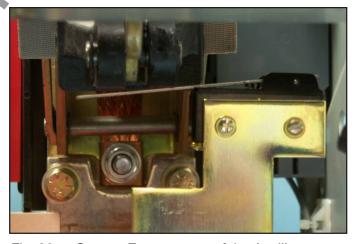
Correct Engagement of the Auxiliary Switch Arm.
